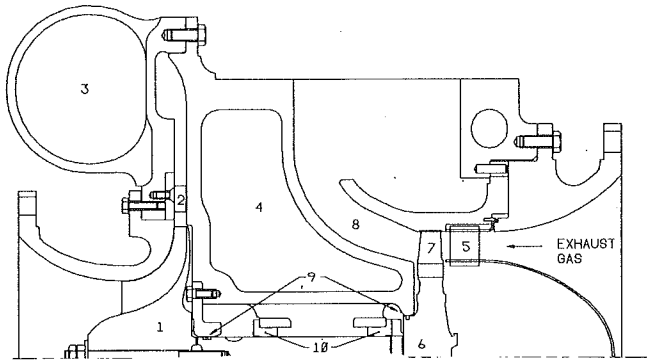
(1) Compressor wheel; (2) vane diffuser; (3) discharge scroll; (4) bearing casing; (5) nozzle ring; (6) turbine rotor; (7) turbine blades; (8) exhaust diffuser; (9) piston rings; (10) bearings
